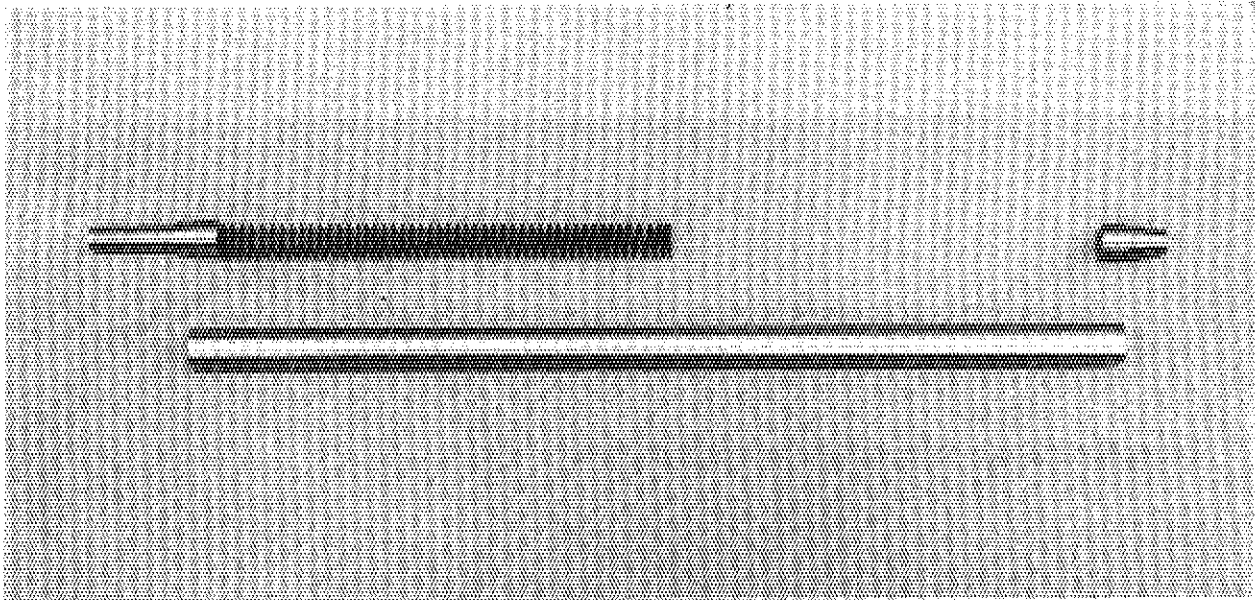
External appearance of cladding tubes, upper and lower endplugs and springs
